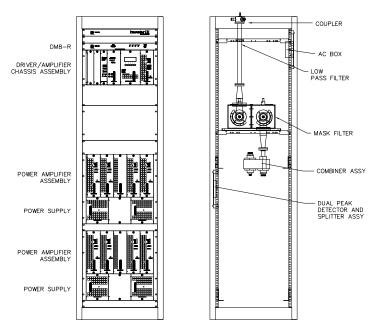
Cabinet Front and Rear View Reconnection Drawing
